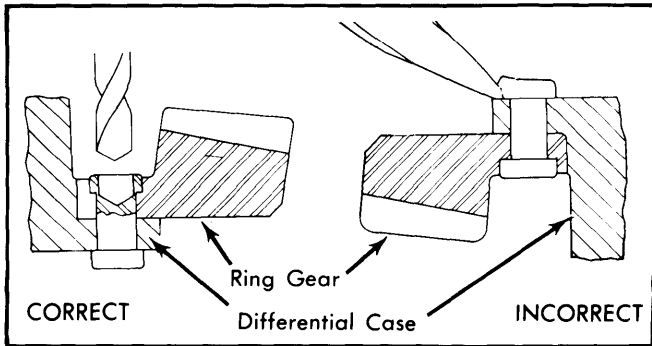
View Showing Correct & Incorrect Methods of Removing Ring Gear Rivets
